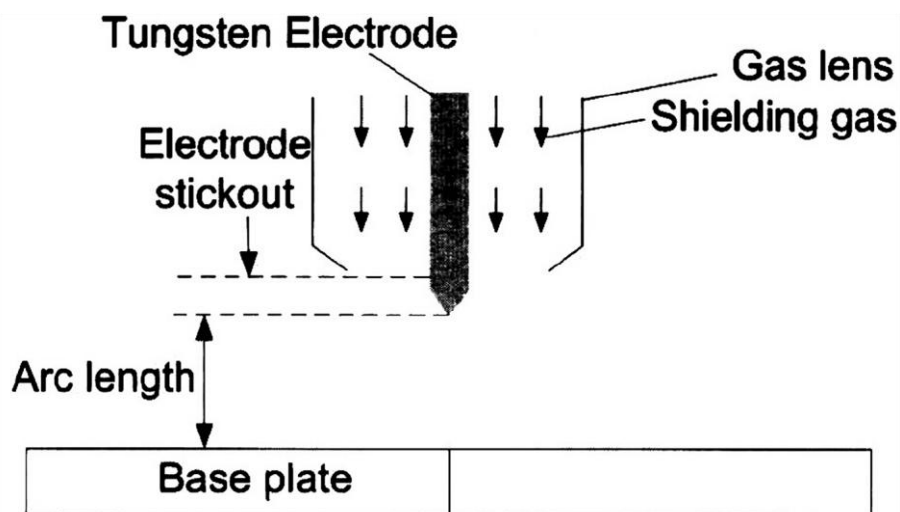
Schematic drawing of gas tungsten arc welding [155].
